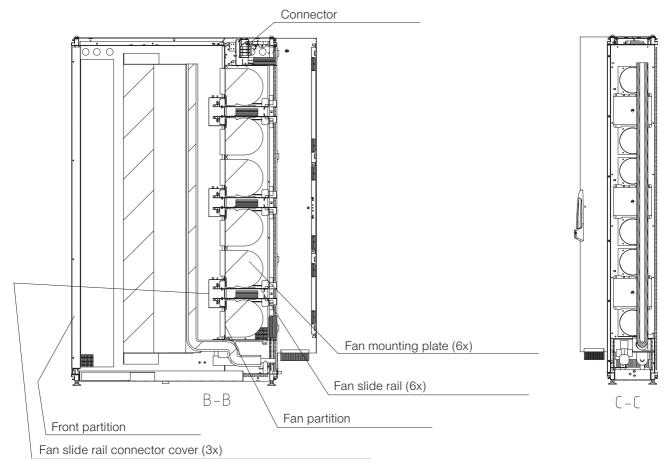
Overview diagram – Liquid Cooling Package Inline (detail B and C)
